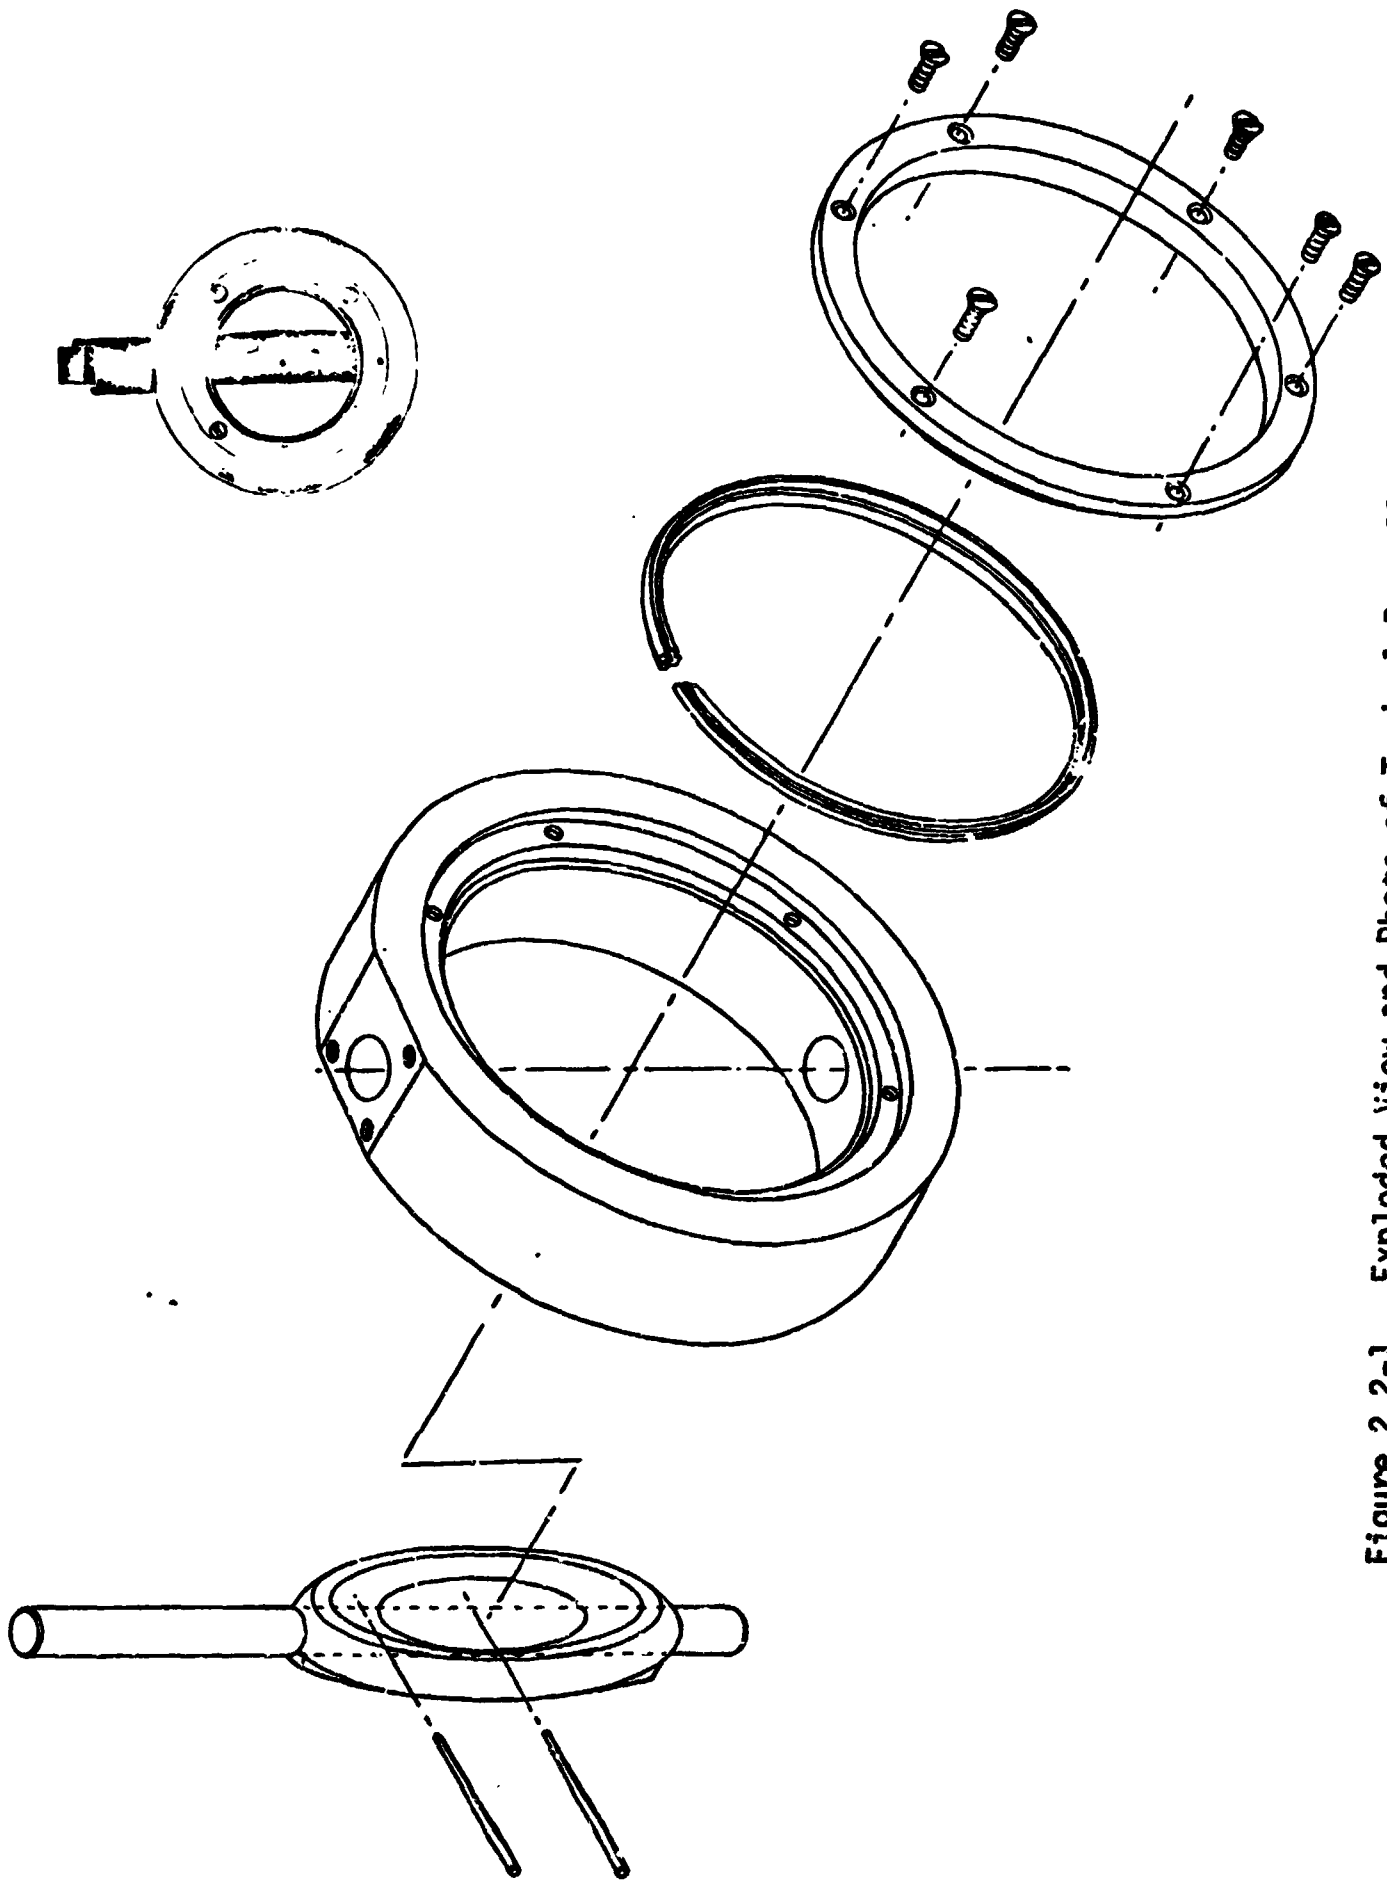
Exploded View and Photo of Typical Propellant Valve
